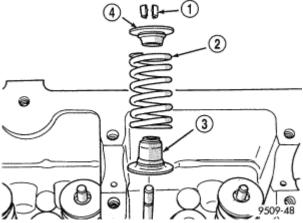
Valve Keeper Tool Courtesy of CHRYSLER LLC
